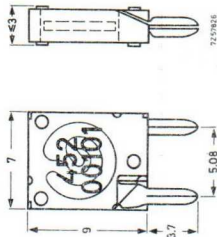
Version for printed-wiring boards, with holes of 1.3 mm
